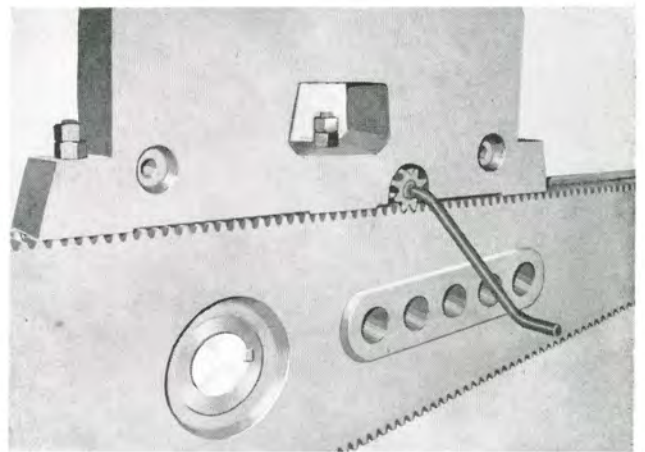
New removable pinion (with crank handle attached) is used to adjust all counterweights.
